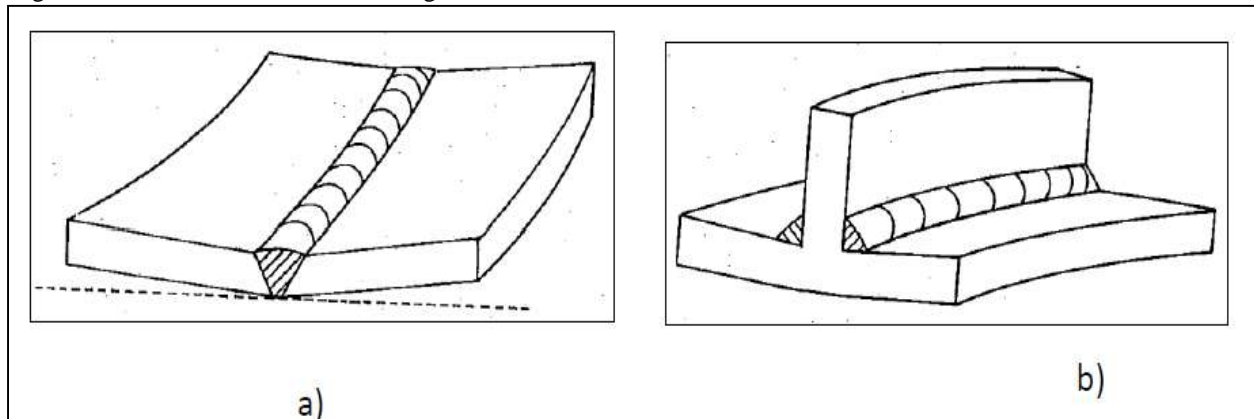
Distortion in Butt (a) and Fillet (b) joint
